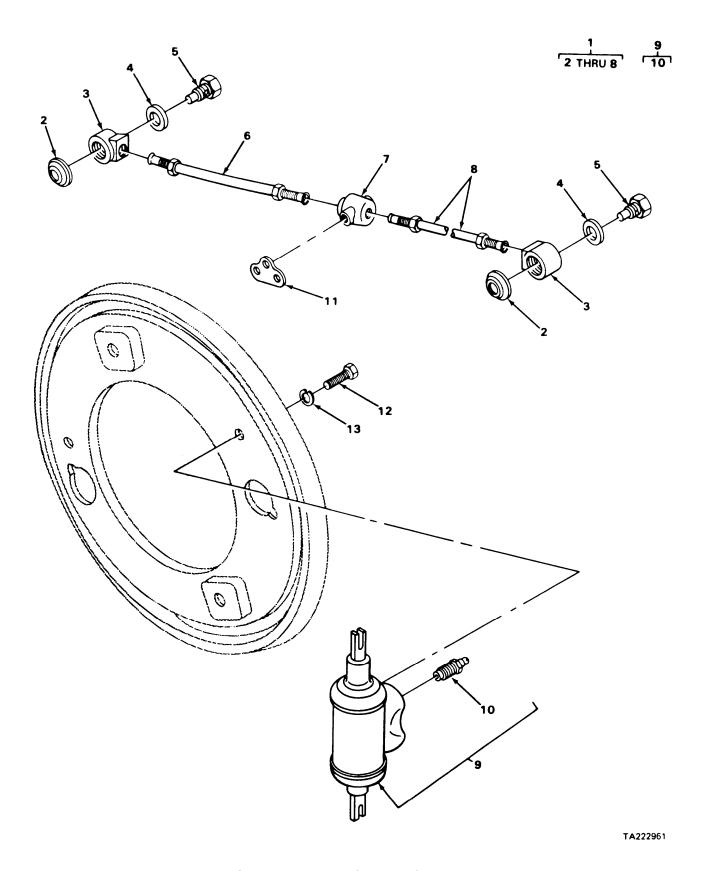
HYDRAULIC WHEEL CYLINDER.
